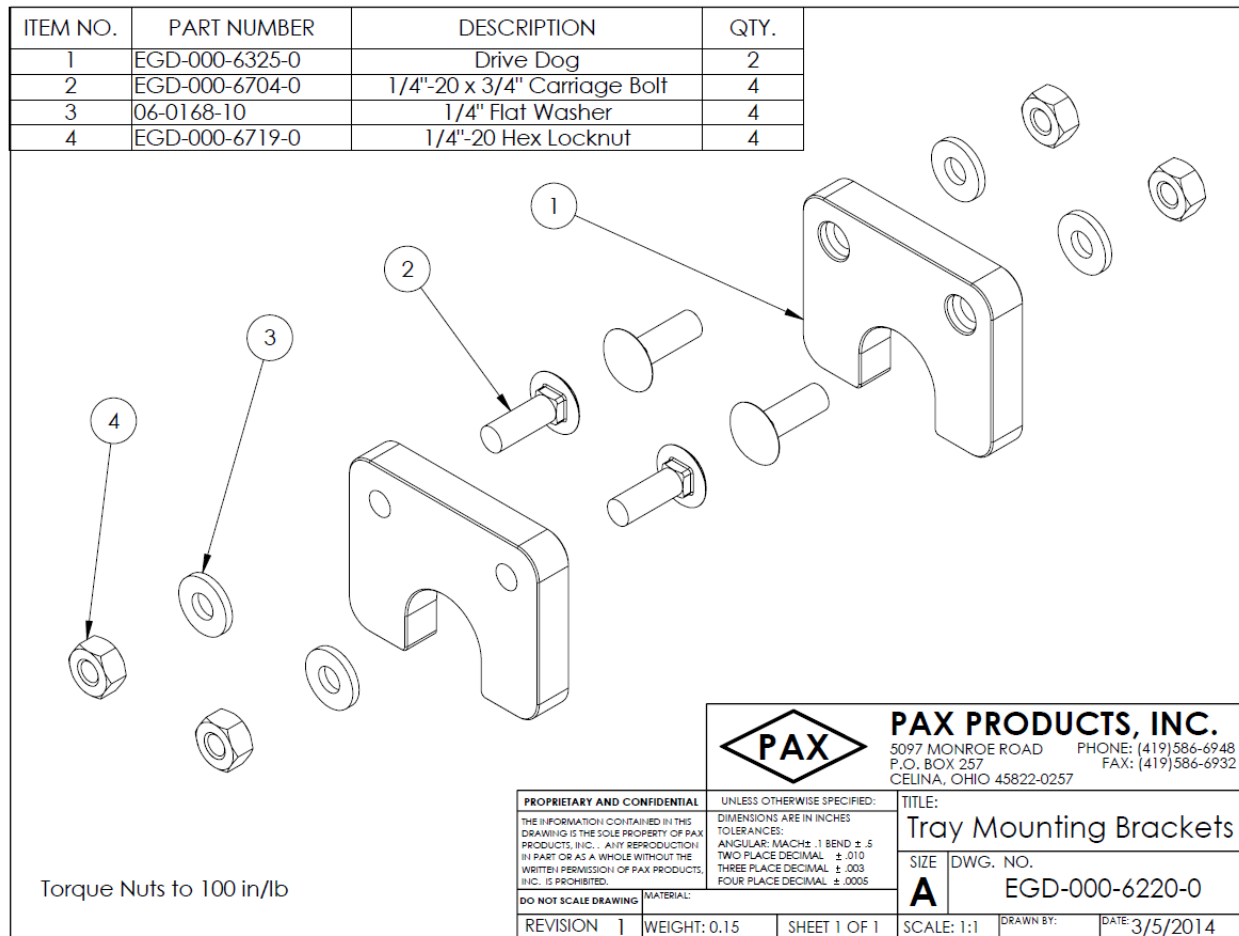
EGD-000-6220-0 TRAY MOUNTING BRACKETS
